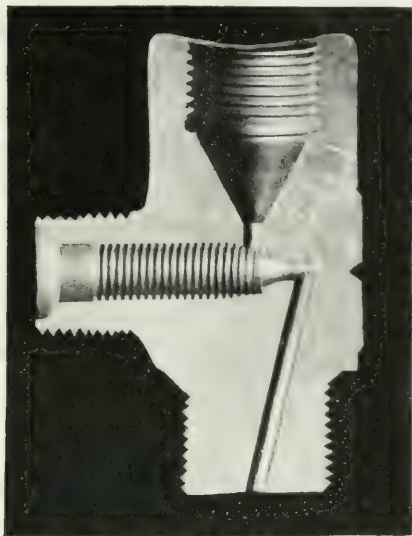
SECTION OF A "NOZZLE" CYLINDER.
